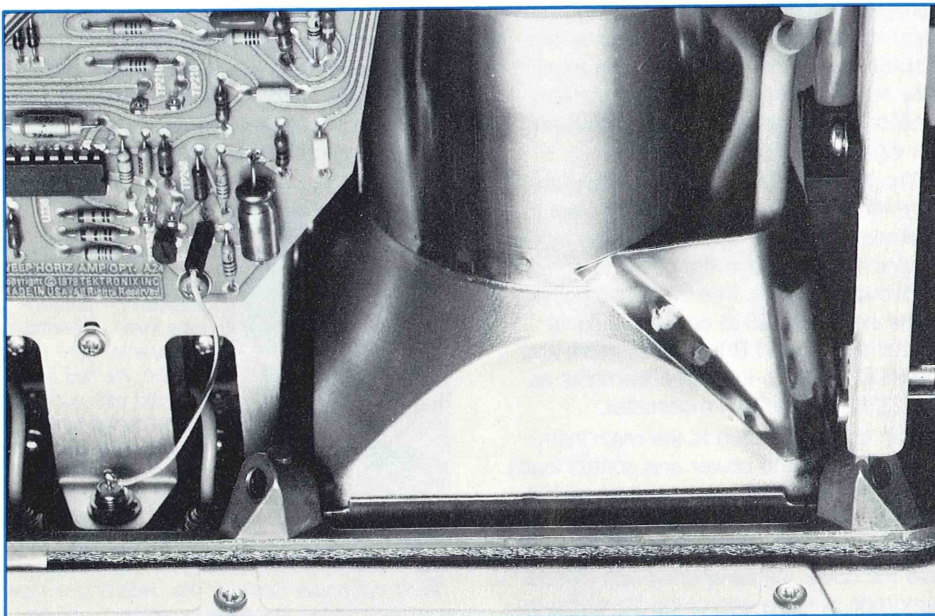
Unique mounting system which supports the CRT only at the front panel reduces probability of damage to the CRT should the instrument be subjected to a severe drop.
